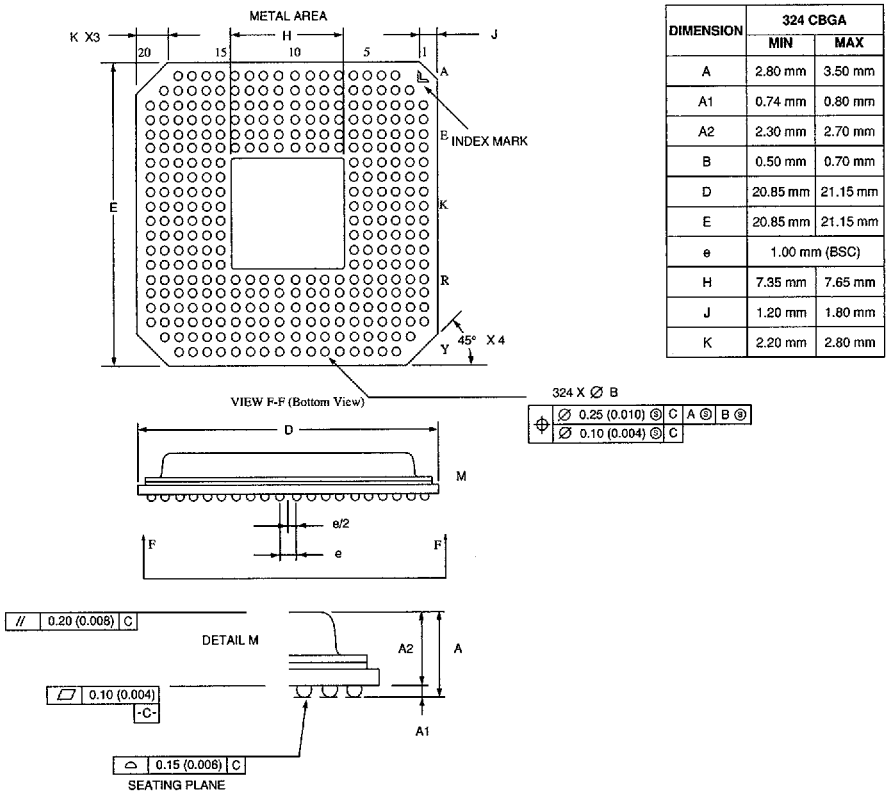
Mechanical Dimensions for the 324-Pin Ceramic BGA Package
